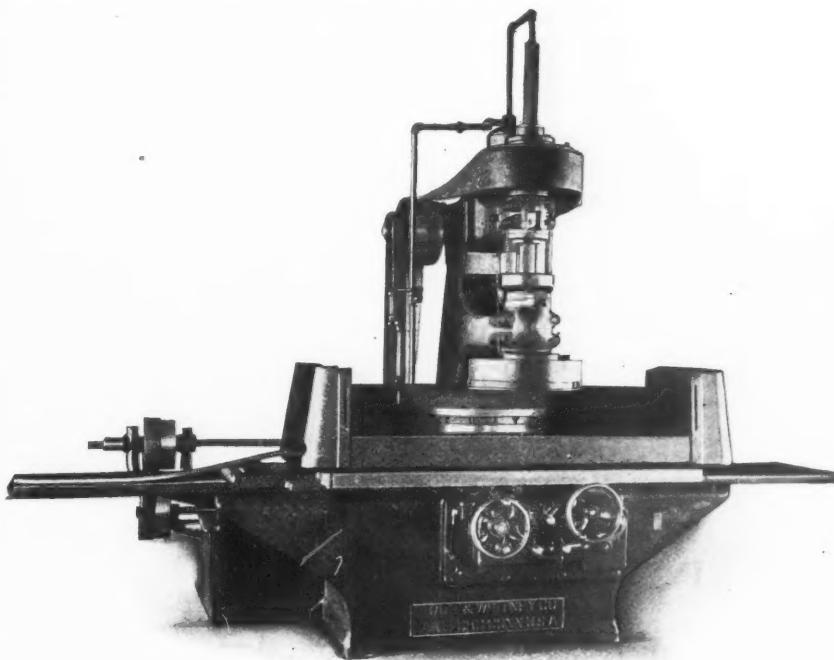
Front View of Pratt & Whitney 22-inch Vertical Surface Grinder
